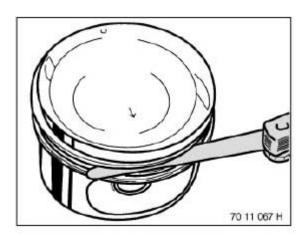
Identifying Clearance Of Piston Rings In Piston Ring Groove Courtesy of BMW OF NORTH AMERICA, INC.
